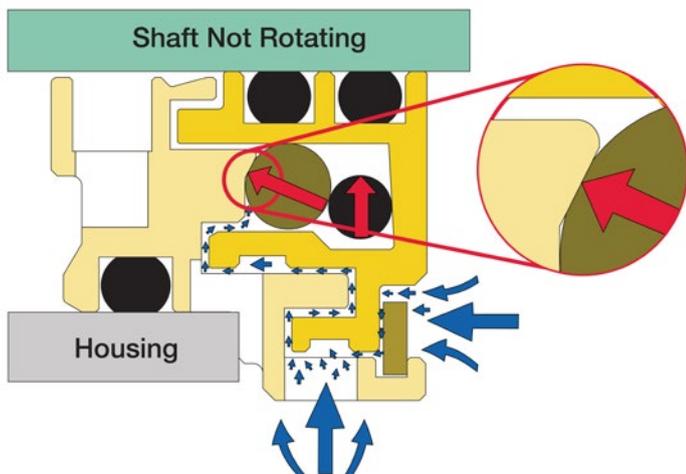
As the equipment cools, the oil/air mixture contracts, sucking air from the atmosphere through the bearing seal into the housing
